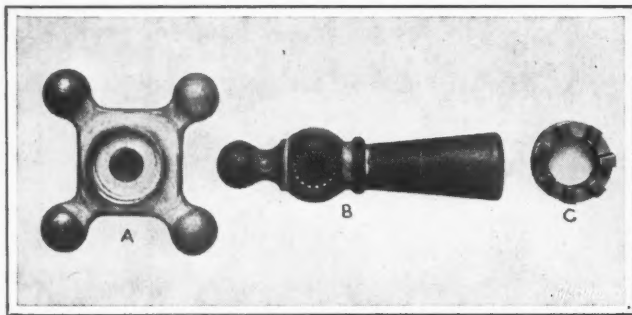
Faucet Handles and Roller Bearing Cage made by the Die-casting Process
